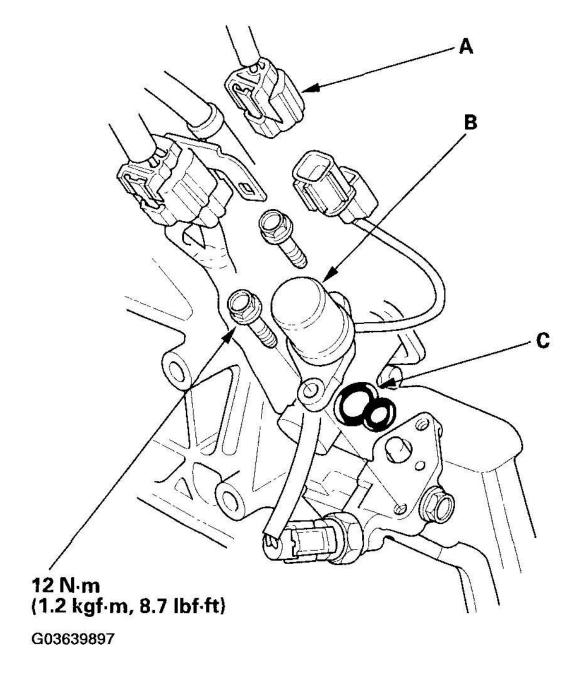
Disconnecting Rocker Arm Oil Control Solenoid (VTEC Solenoid Valve) 1P Connector Courtesy of AMERICAN HONDA MOTOR CO., INC.
